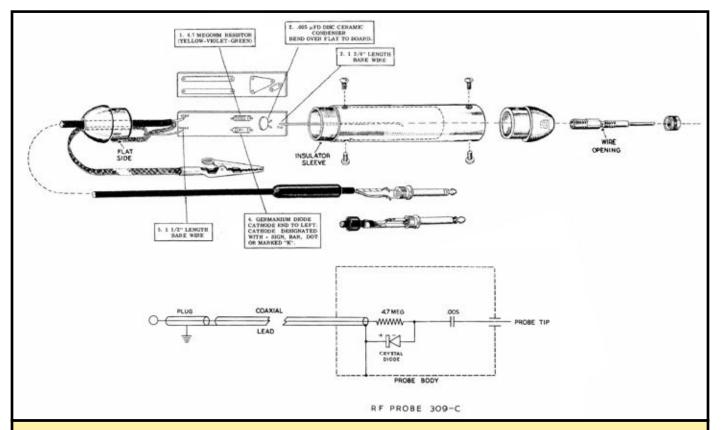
Schematic and assembly drawing of the #309C probe using the later "Red - Aluminum - Black "probe housing & PC board.
